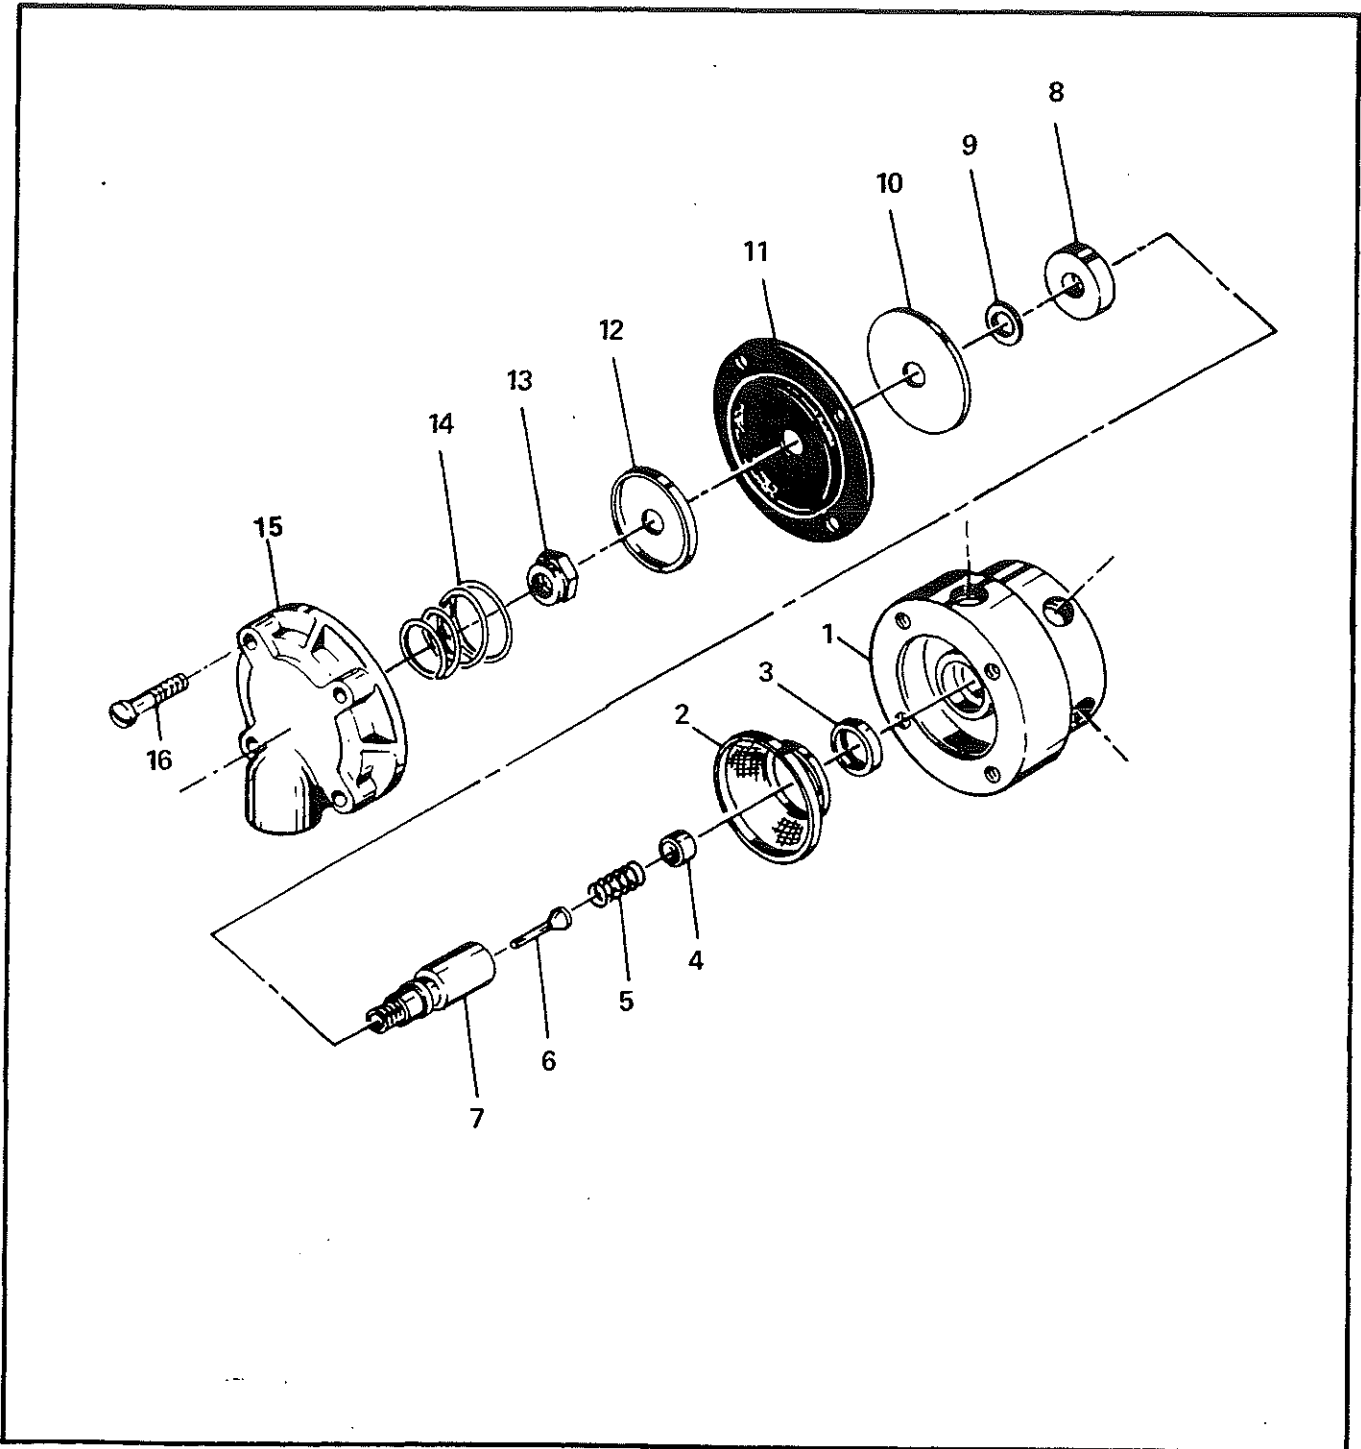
FUEL MANIFOLD VALVE ASSEMBLY.
